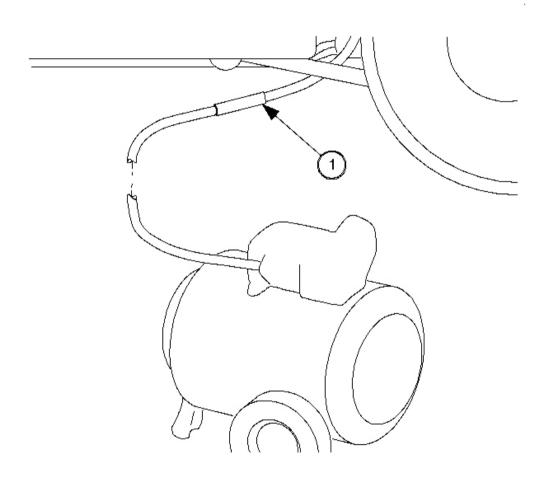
View Of Adapter From SA9127E-7 Courtesy of GENERAL MOTORS CORP.
